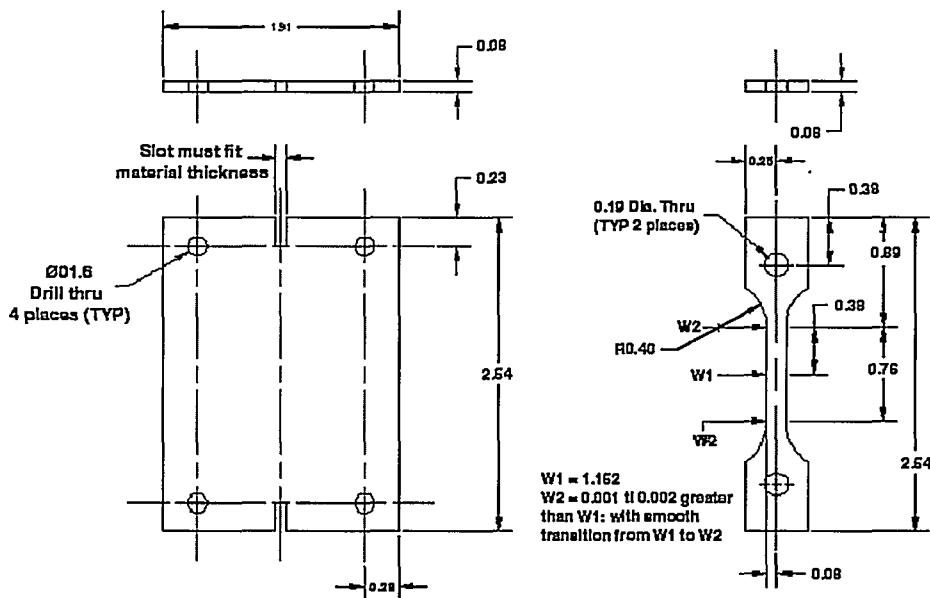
Dimensions (in cm) of rectangular coupons and miniature tensile specimens.
